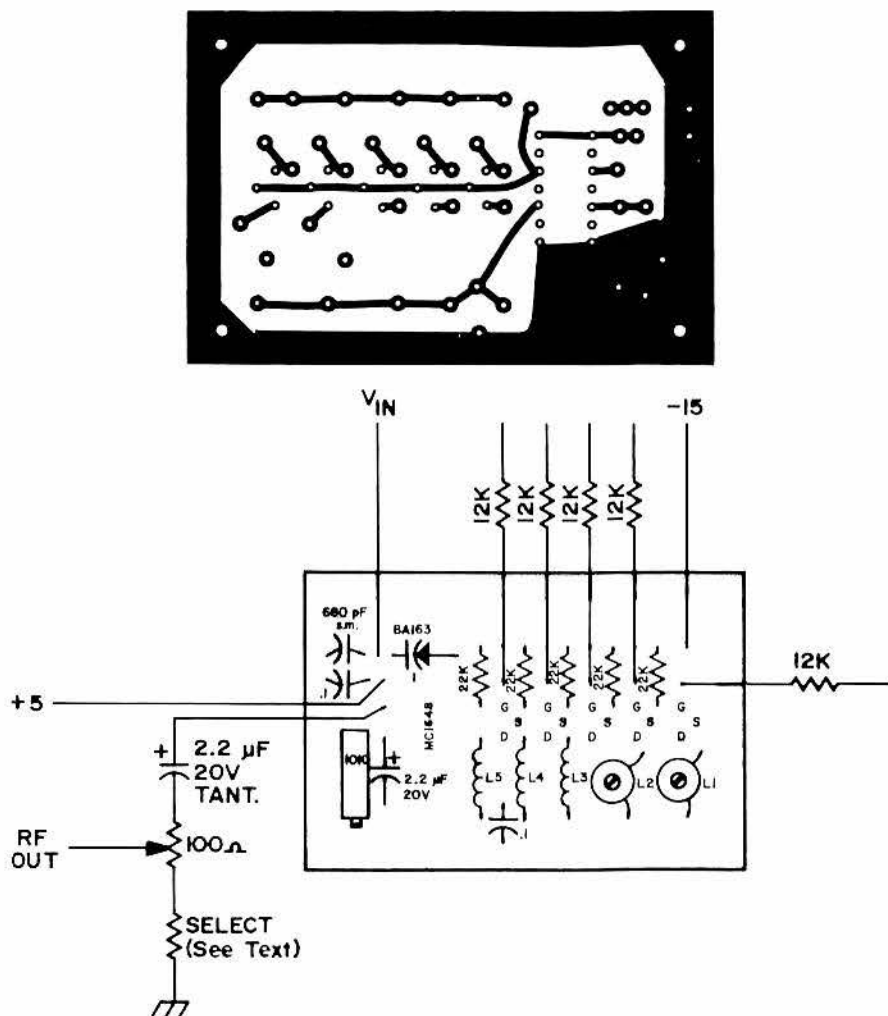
(A) Foil side of rf pc board. (B) Location of parts on component side.
